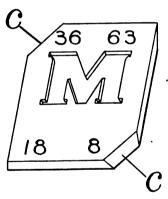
Monotype, large-work matrix. Full size. The Dyotype matrix, fig. 179, is of trapezoidal shape, and has semicircular grooves on two of the opposite sides for the retaining pins which lock the matrices in place in the matrix-wheel of the machine. The strike occupies a position on the outer surface of the wheel so built up.
